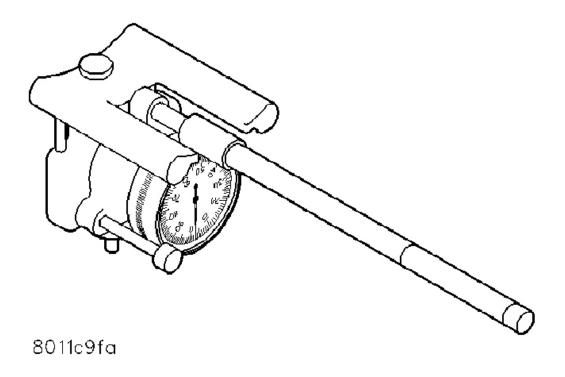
Indicator, Cylinder Bore C-119 Courtesy of CHRYSLER LLC
